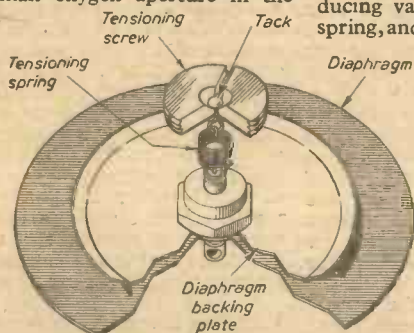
Arrangement for tensioning the diaphragm to keep the low-pressure inlet valve normally closed.
